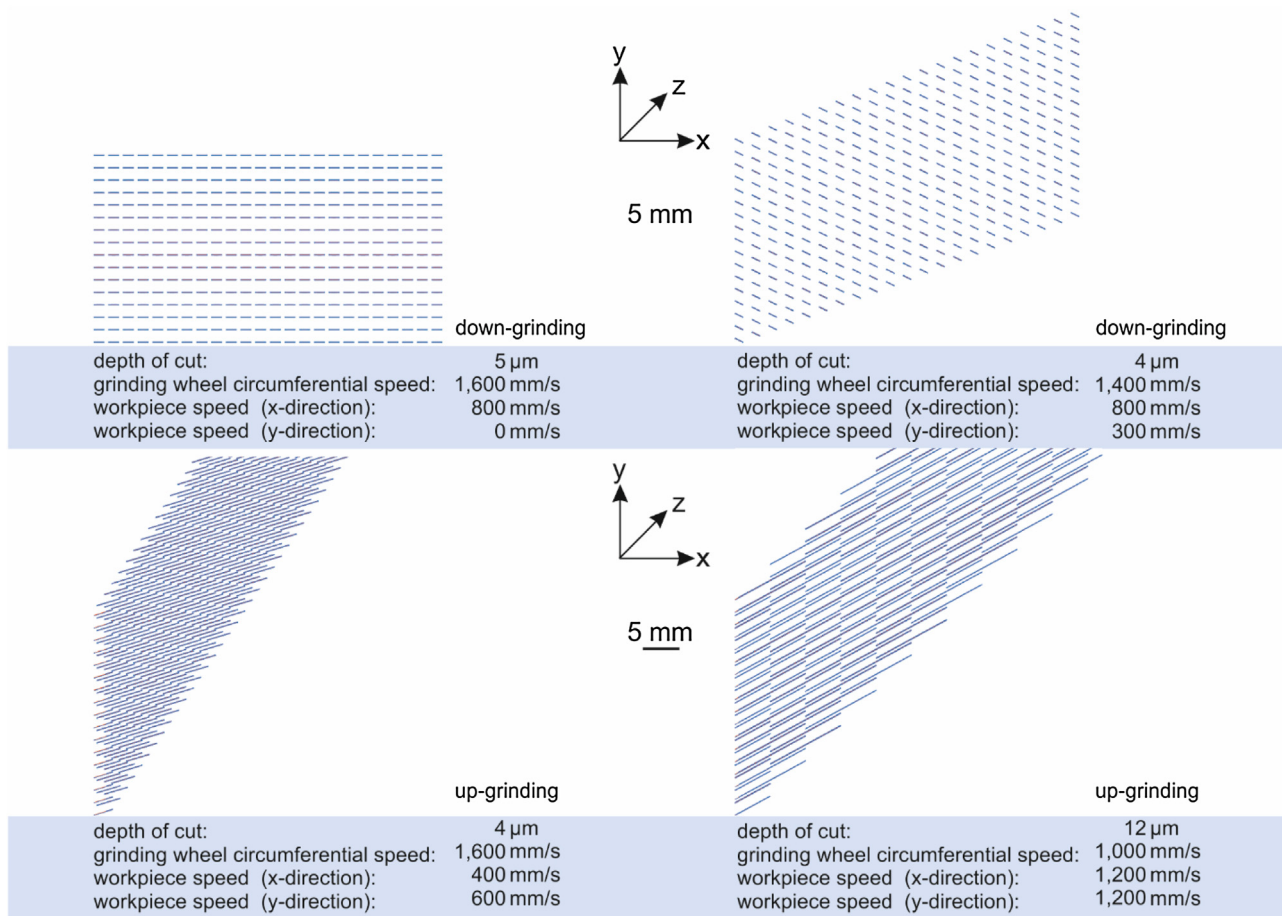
Some possible structures that can be manufactured using the presented prototype grinding wheel.
